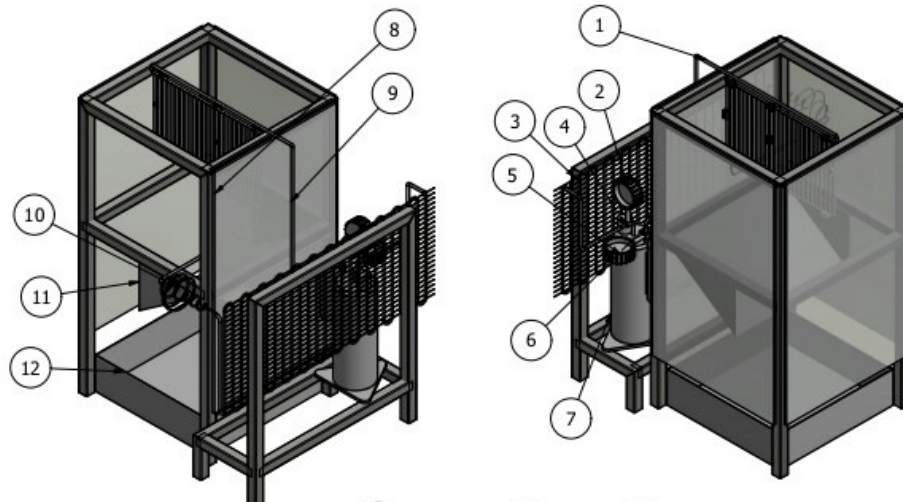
Natural convection water harvester water machine apparatus. (1) evaporator, (2) compressor outlet pressure gauge, (3) condenser, (4) compressor outlet pipe, (5) compressor inlet pressure gauge, (6) compressor inlet pipe, (7) compressor, (8) insulated wall, (9) pipe to compressor inlet, (10) capillary tube, (11) dew draining place, (12) dew water collection tank.
